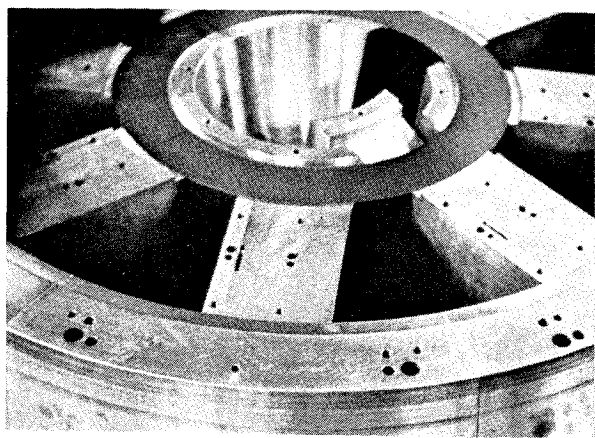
Wax pattern tooling; removal of inside i.d. ring die blocks.
